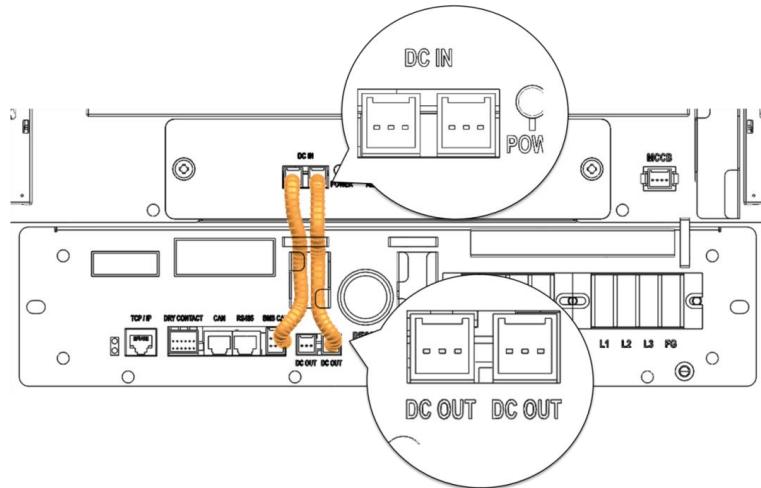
DC Power Cables from SMPS Assembly Type A to SMU
